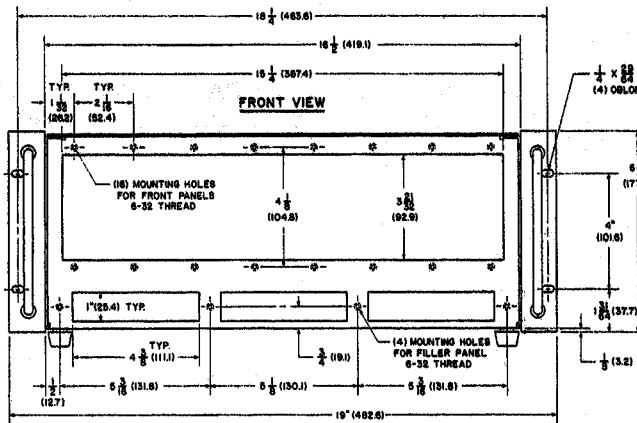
MECHANICAL OUTLINE DRAWING, KEPKO MODEL RA 43 RACK ADAPTER.
